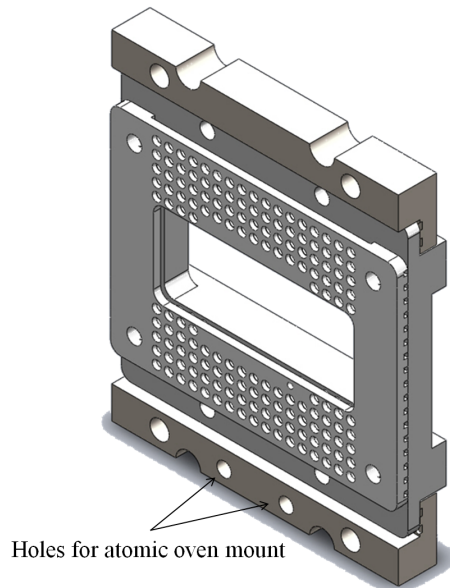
Solidworks drawing of the two PEEK plates and clamps.
